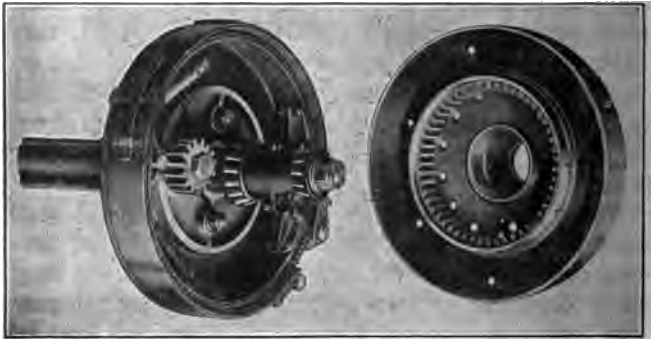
Operating Parts of Internal Gear Rear Axle.
